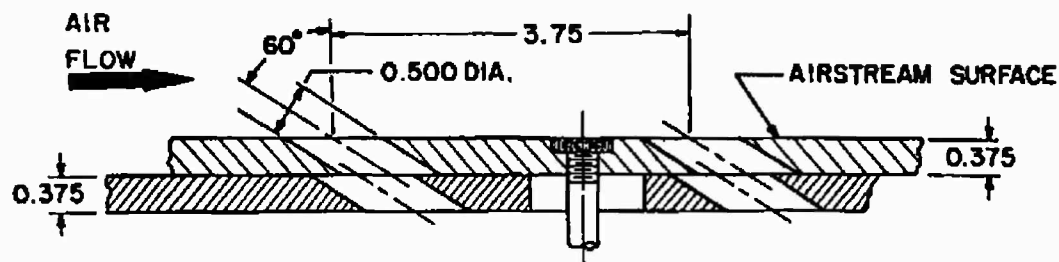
Details of Tunnel 16T Perforated Test Section Walls
